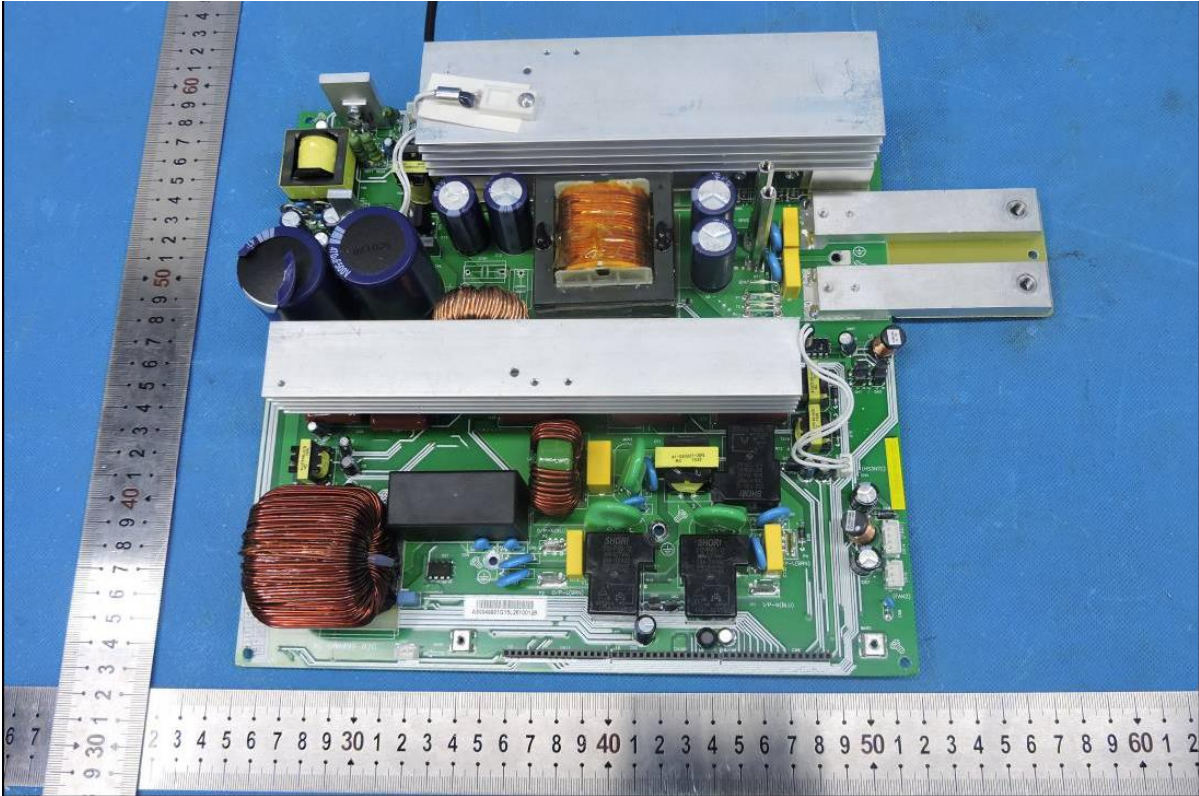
PCB of main board components view (FlinInfini Lite 2kW-24V)
